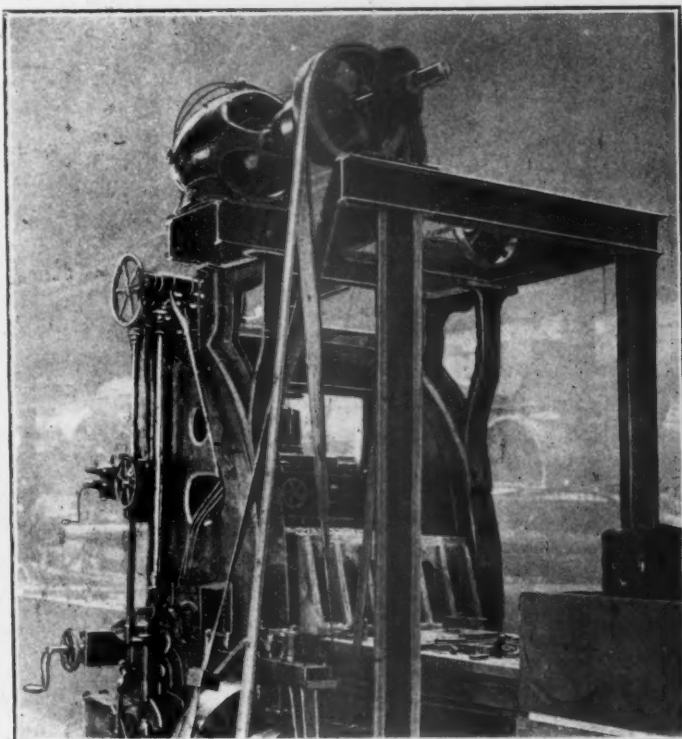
REAR VIEW OF THE MOTOR-DRIVEN PUTNAM PLANER, SHOWING STRUCTURAL SUPPORT FOR DRIVE.—MILWAUKEE MOTOR.
